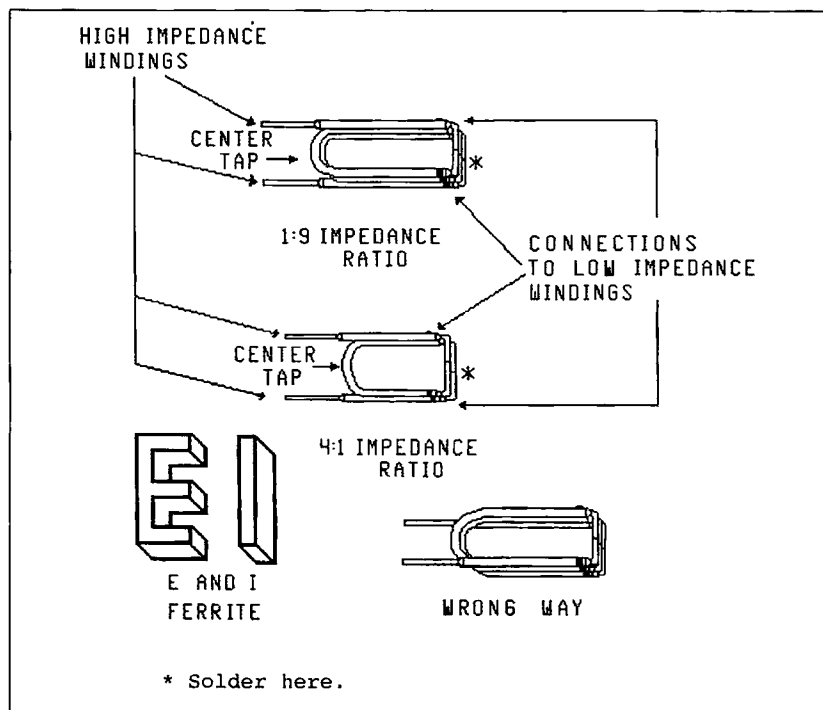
Preparation of the transformers. The leads between the transformer windings should be as short as possible. Bend the coax and bend the leads till they touch tip to tip, and solder the tips together. When properly assembled, an ohmmeter check will show a closed circuit between the two ends of the transformer leads and an open circuit between the inner and outer conductors. The mistake made on the bottom right drawing is easily made by persons assembling the transformers themselves. Nothing feels worse than getting the transformer assembled and having to redo it.
